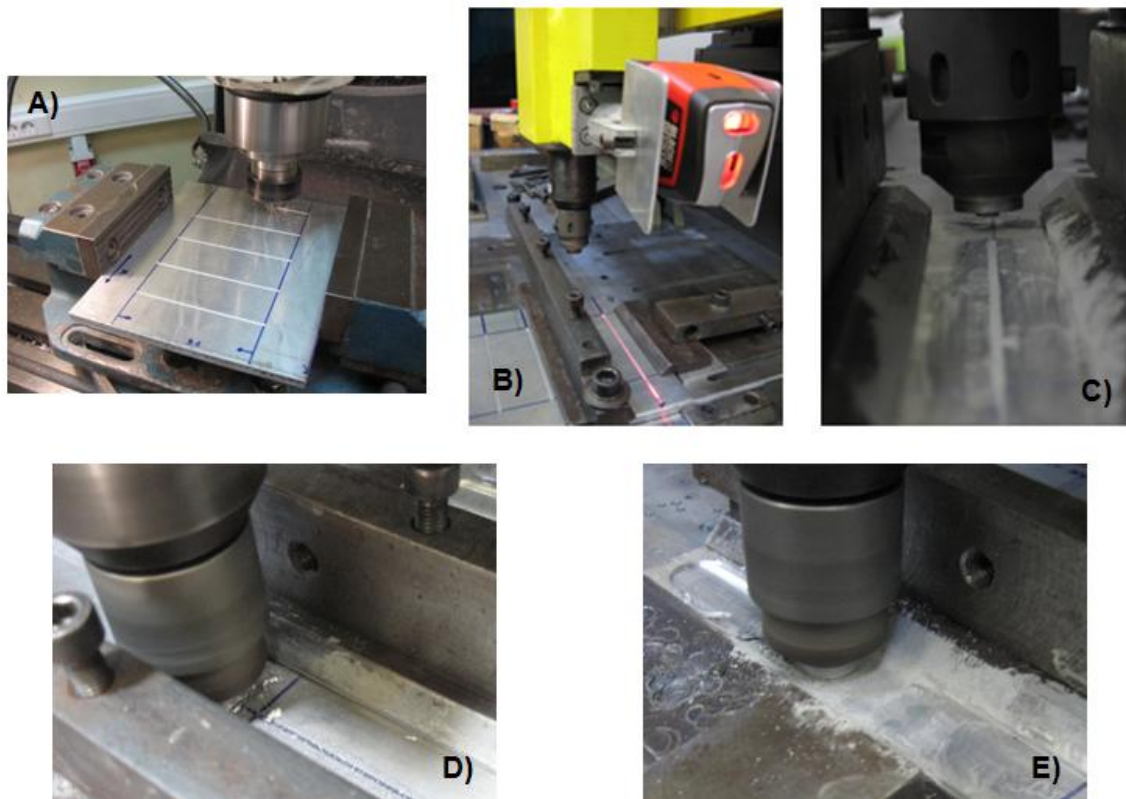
Step sequence in the production of aluminium surface composites by friction stir processing of grooves packed with SiC. A) Channel milling; B) Tool path alignment with groove direction; C) Tool positioning for test D12-H; D) Tool penetration and dwell time for test D118-H; e) Experiment S12-H.
